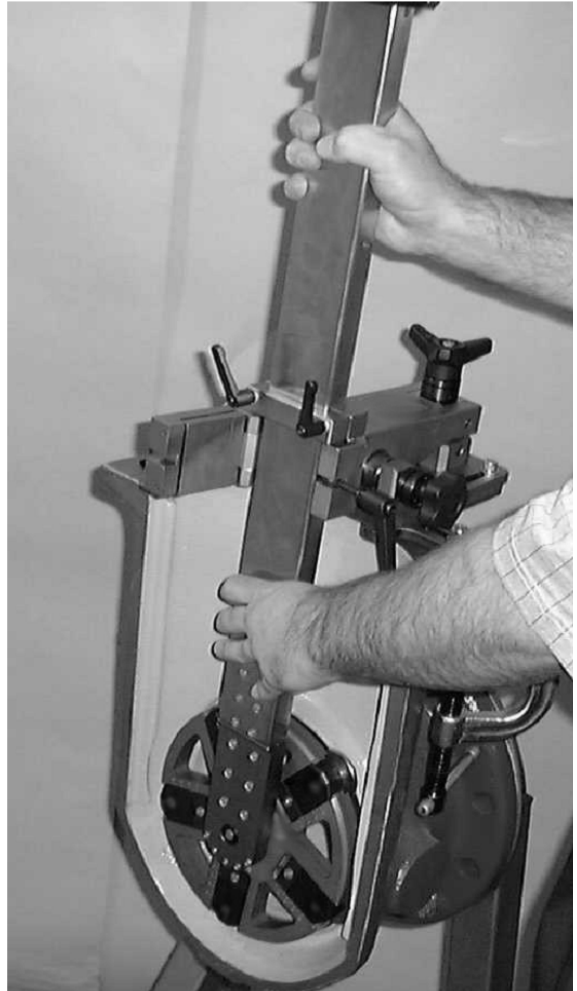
LOCATING THE MACHINE ARM INTO THE TILTING ADAPTER
